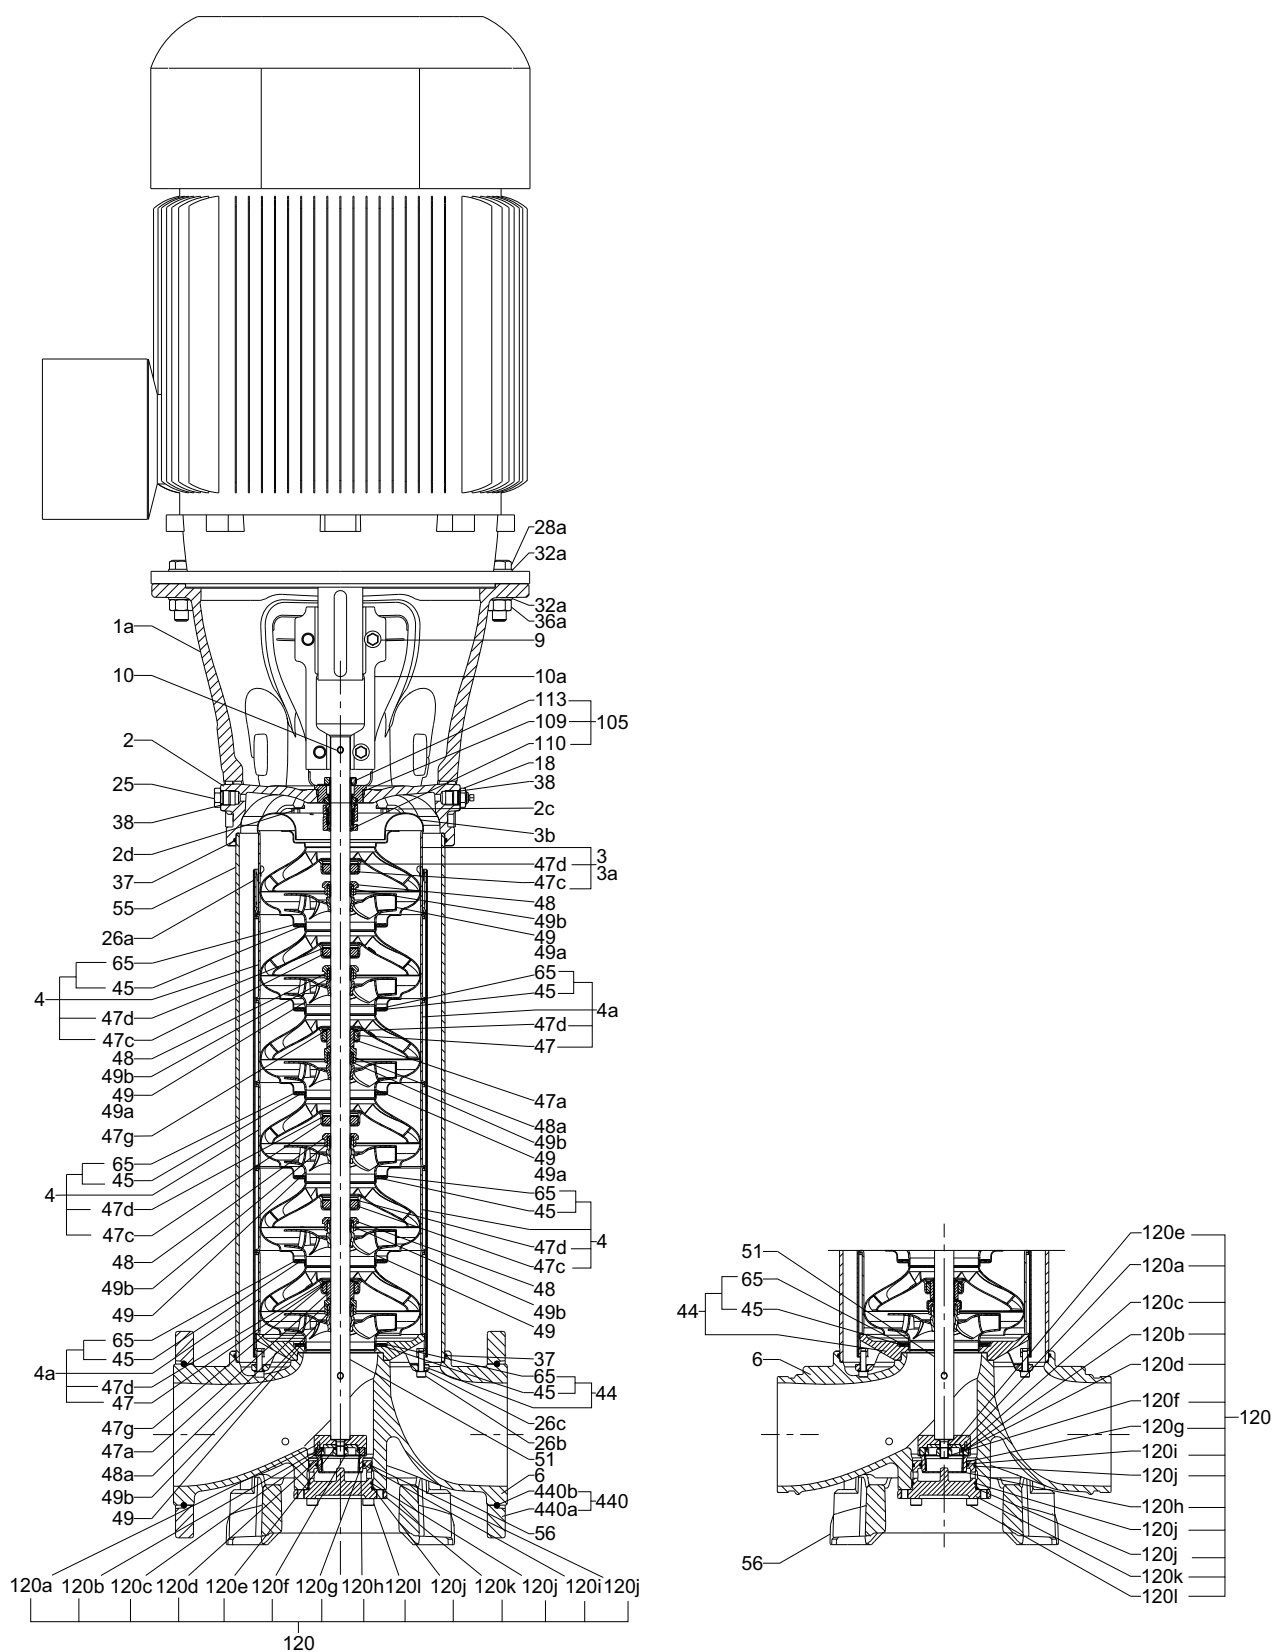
Sectional view of CR, CRN pump with Ø28 or Ø36 shaft and with thrust-handling device
